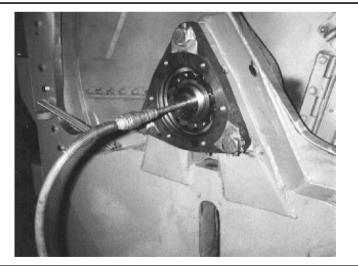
(MSSM0303AE) Connection From Hydraulic Pump to Assist in Bearing Removal
